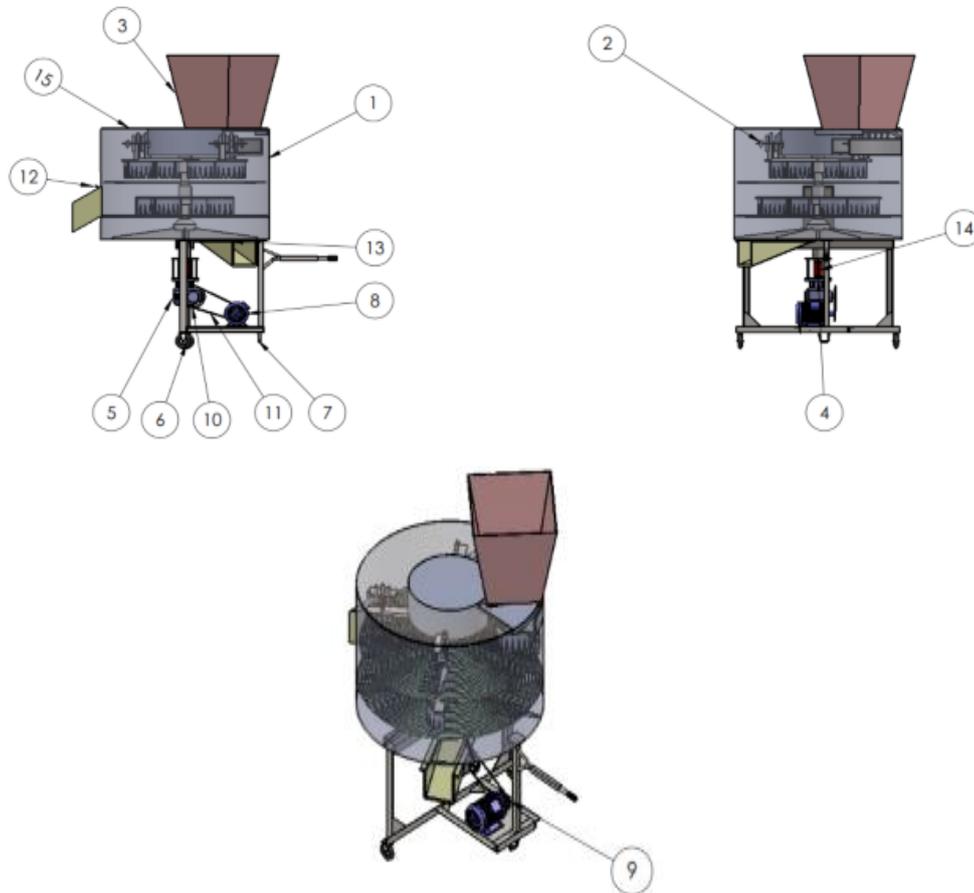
The Cocoa Pod Breaking and Extraction Machine.
